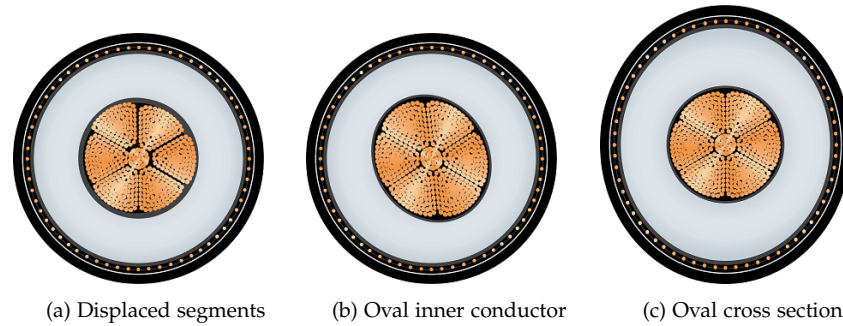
Exaggerated illustration of possible cable geometry fluctuations due to the manufacturing process of the cable; courtesy of Südkabel GmbH
